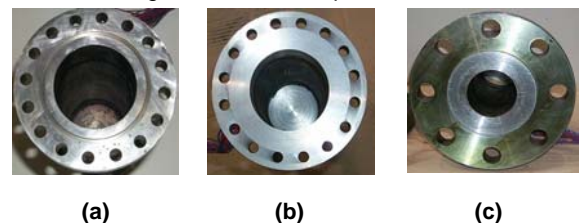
(a) NG flange without O-ring groove, (b) NG Flange with O-ring groove, (c) Gasketed Flange
